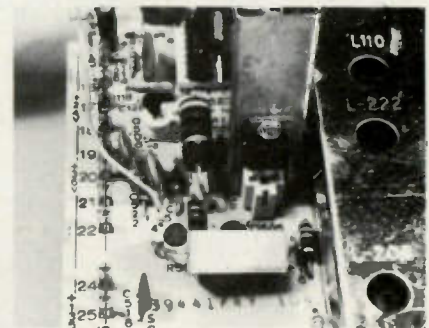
The +35-volt regulator, Q506, also is mounted on the IF module. It has a plug-in socket and a metal heat sink.
